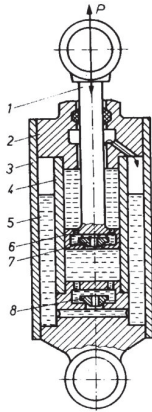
Engineering diagram of double-acting hydraulic damper: 1 – piston rod, 2 – guide sleeve with seal, 3 – outer cylinder, 4 – inner cylinder, 5 – chamber, 6 – piston, 7 – decompression valve, 8 – compression valve)
